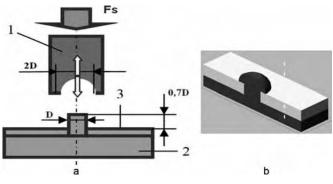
Head shape in the ultrasonic riveting a - before welding; b -after welding.
